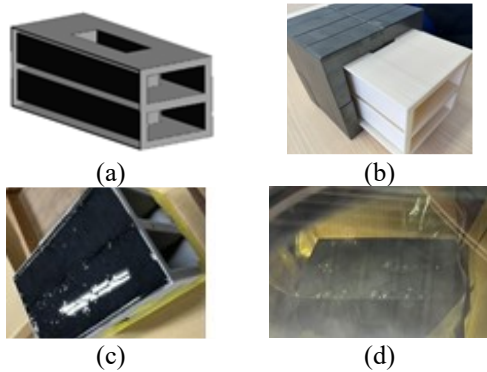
Creation procedure of bobbin molded transformer. (a) Design in 3D CAD. (b) Printed by 3D printer. (c) Plastic insertion. (d) Vacuum defoaming.
